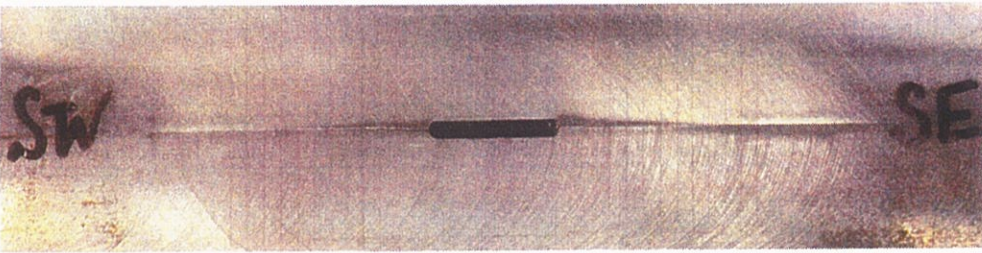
Fatigue crack pass after fatigue crack propagation tests (CT type)
